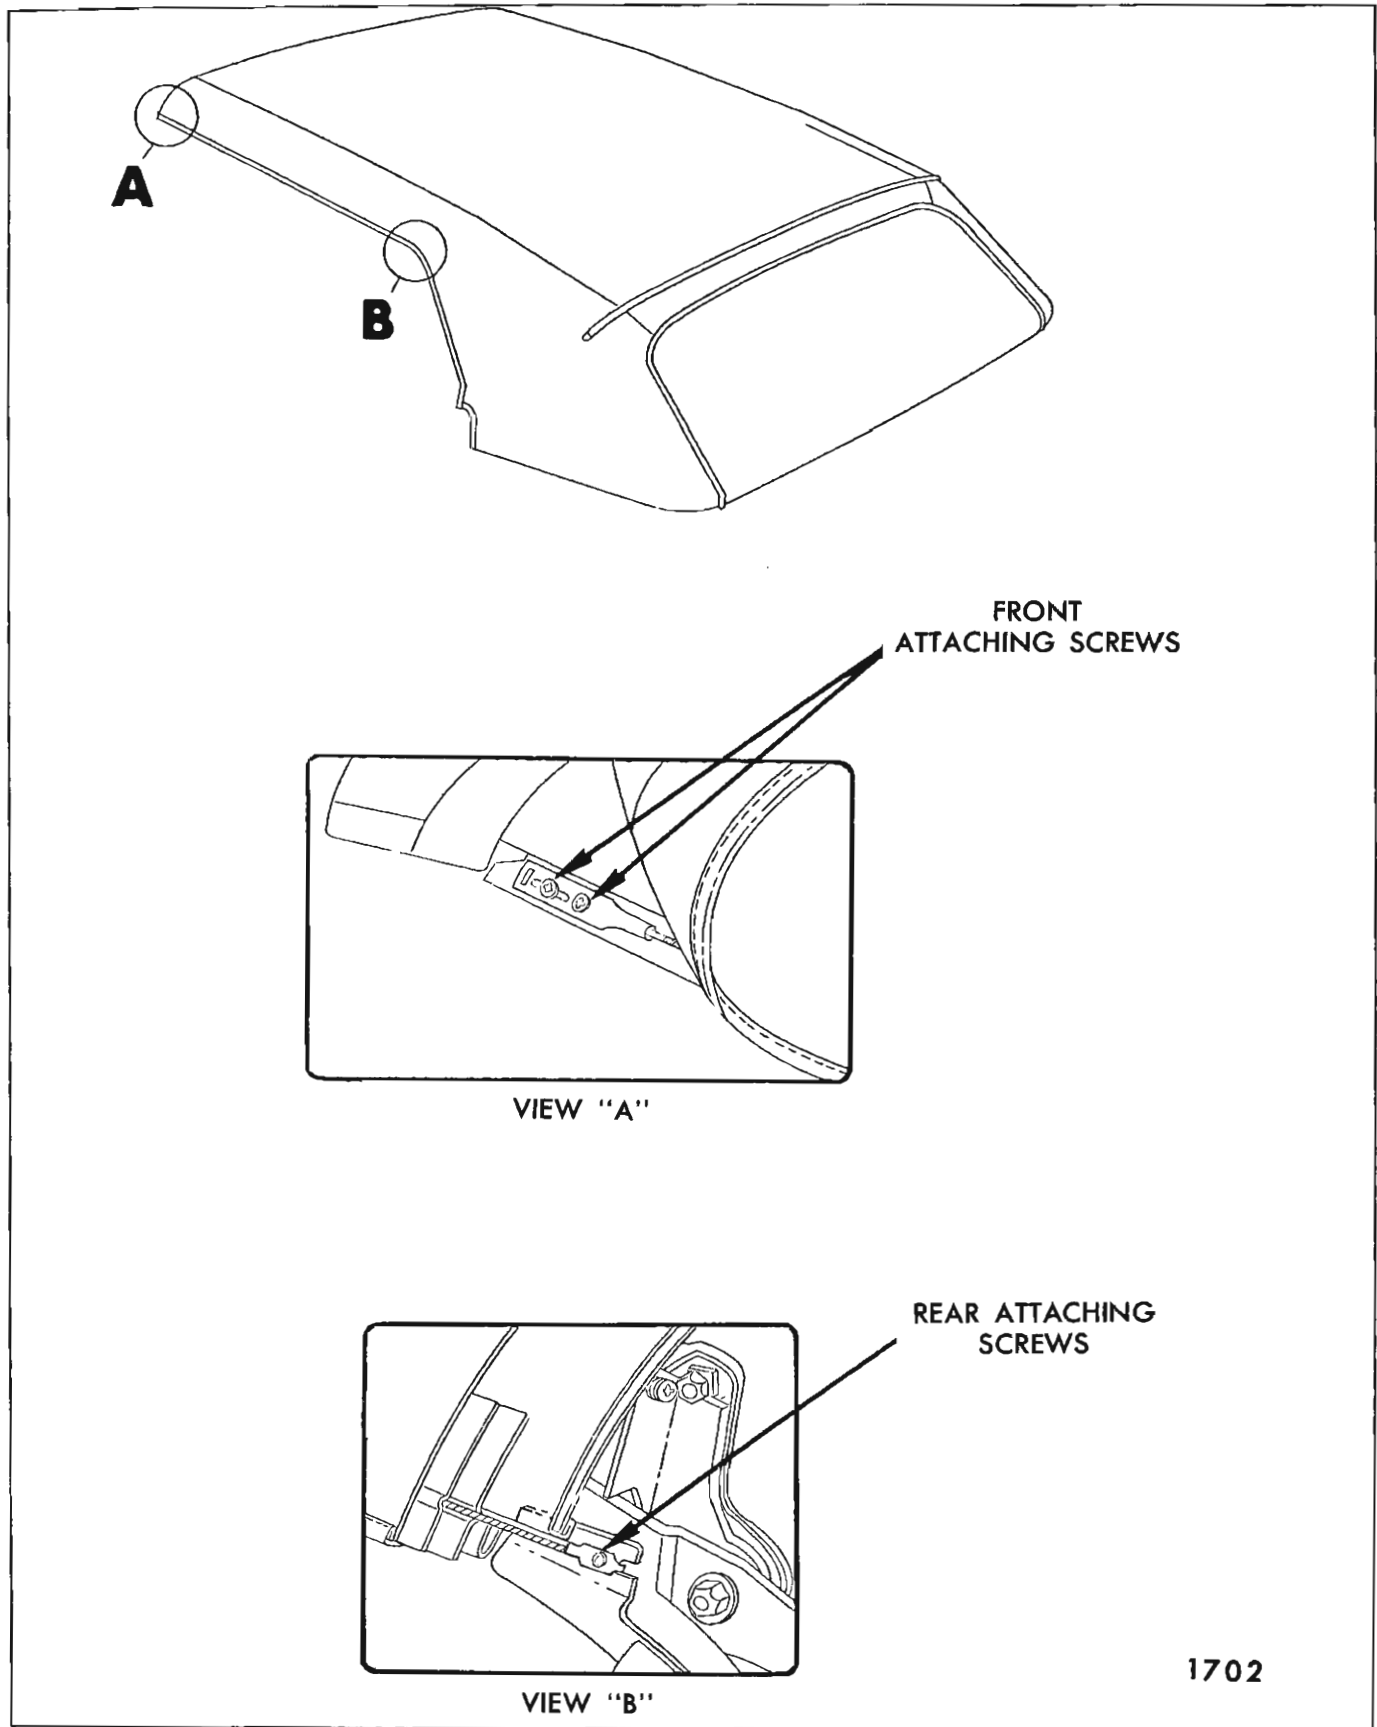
Hold-Down Cable Attaching Screws
